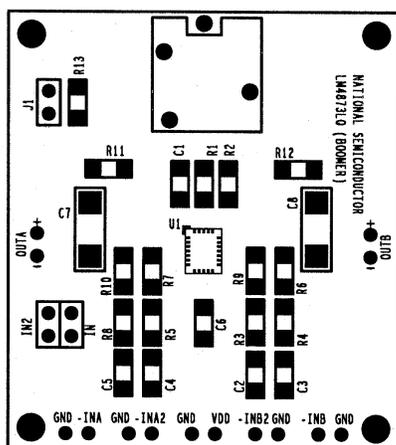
Recommended LQ PC Board Layout: Component-Side Silkscreen
